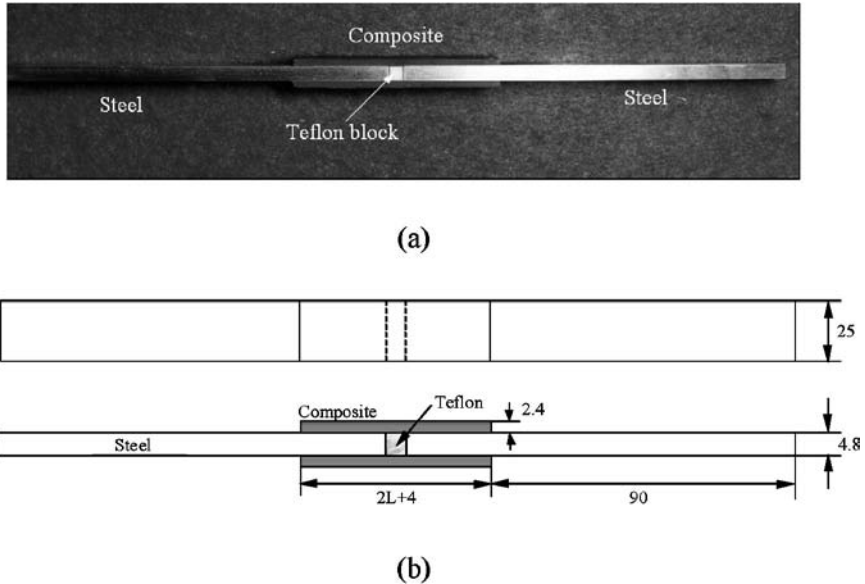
A cocured double lap joint specimen. (a) Photograph of the specimen and (b) shape and dimensions of the specimen.
